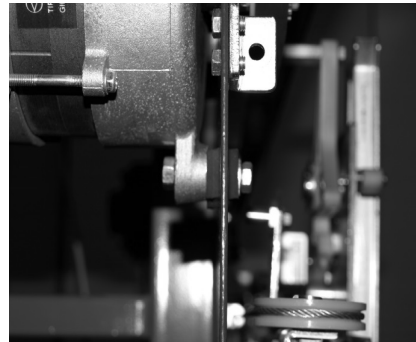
Motor attached with insulating pads made of 6 mm rubber
